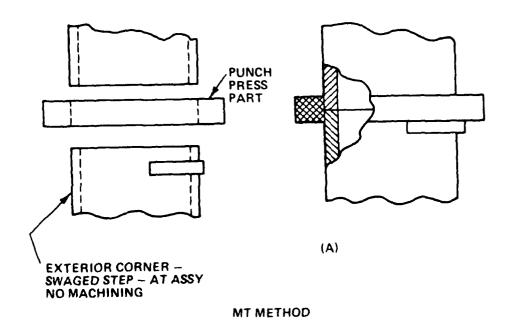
ASSEMBLY OF WINDOW ASSEMBLY TO TUBE
